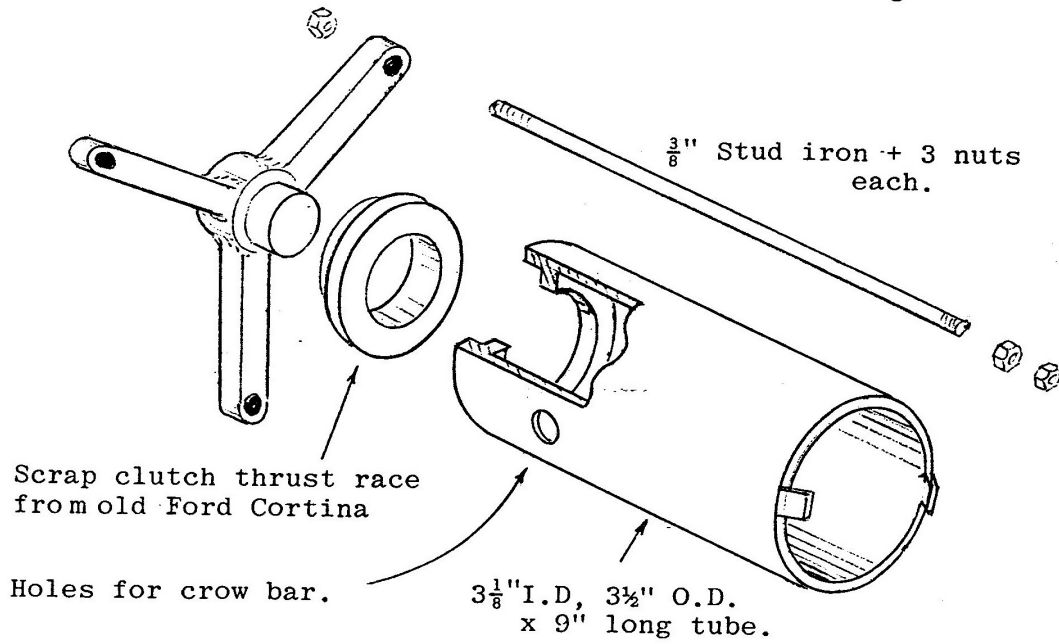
Tool for unscrewing/screwing pinion sleeve.
